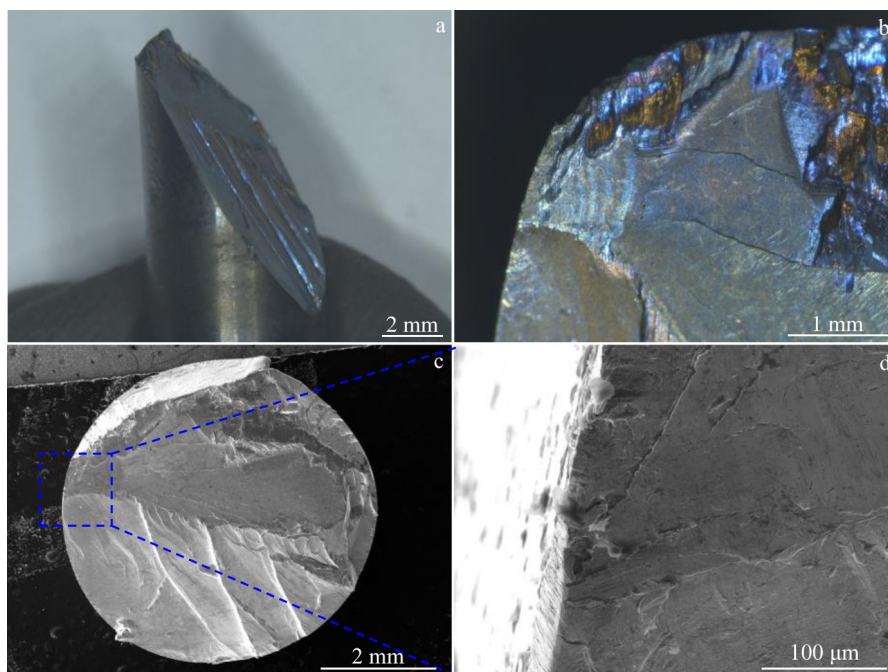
Fatigue crack initiation on the specimen surface ($\Delta\varepsilon/2=0.95\%$)
